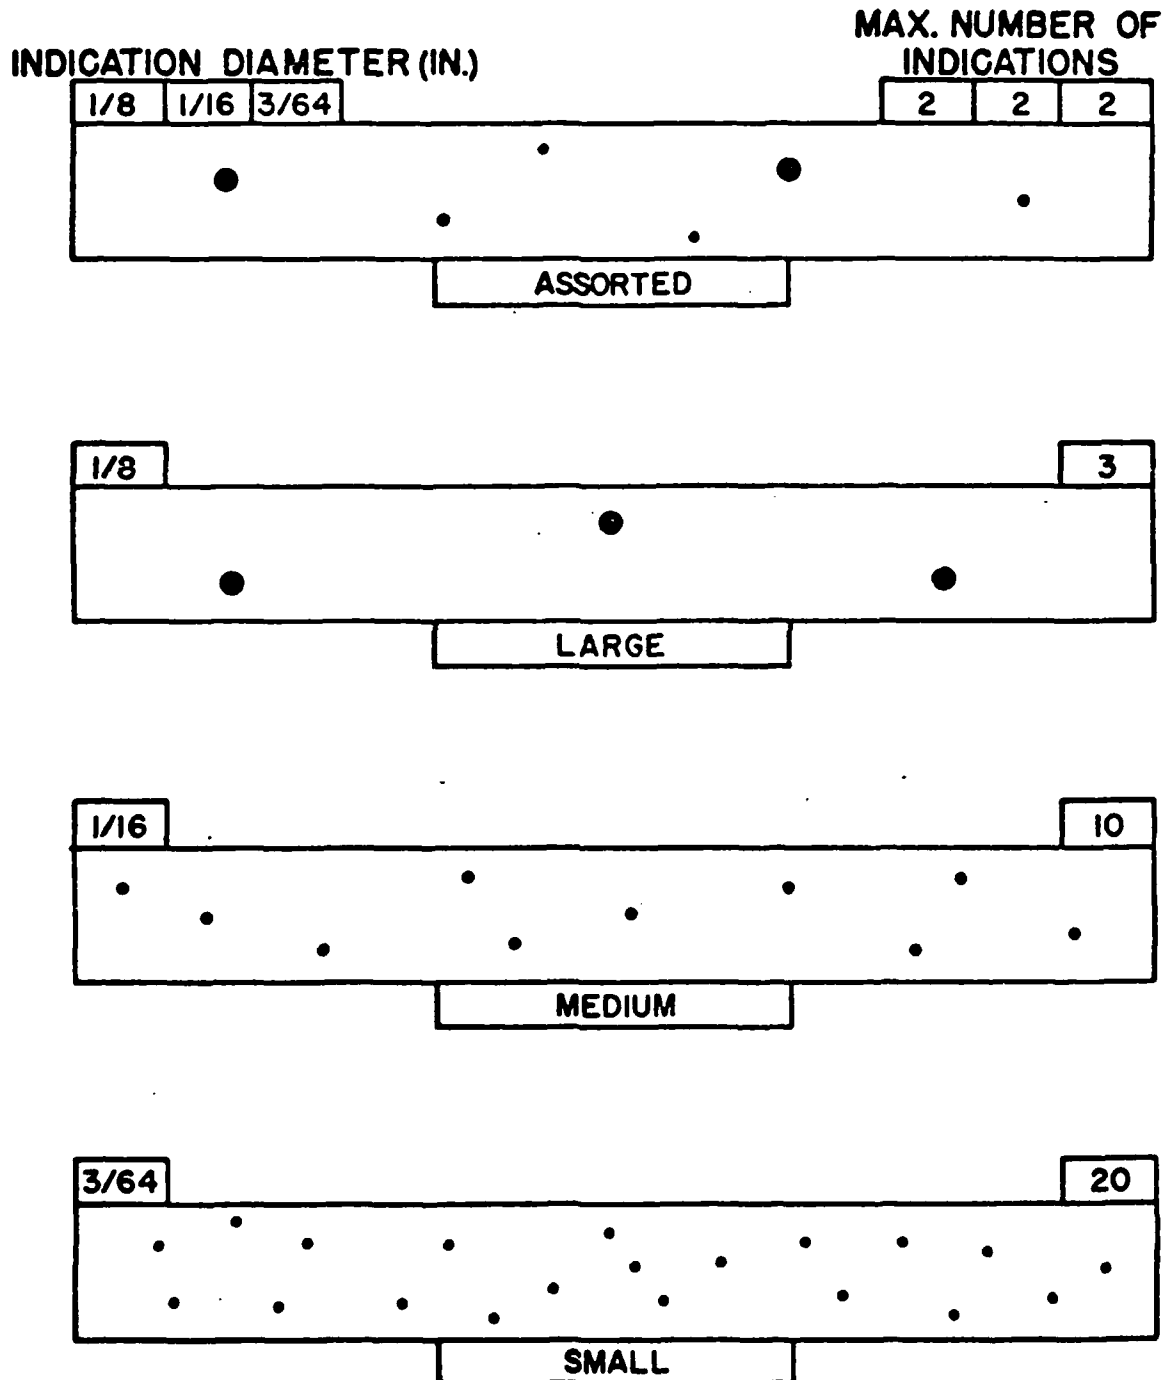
Class 3 Weld Surface Inspection Standards for Scattered Rounded or Non-Linear Indications (Sheet 5 of 6).
